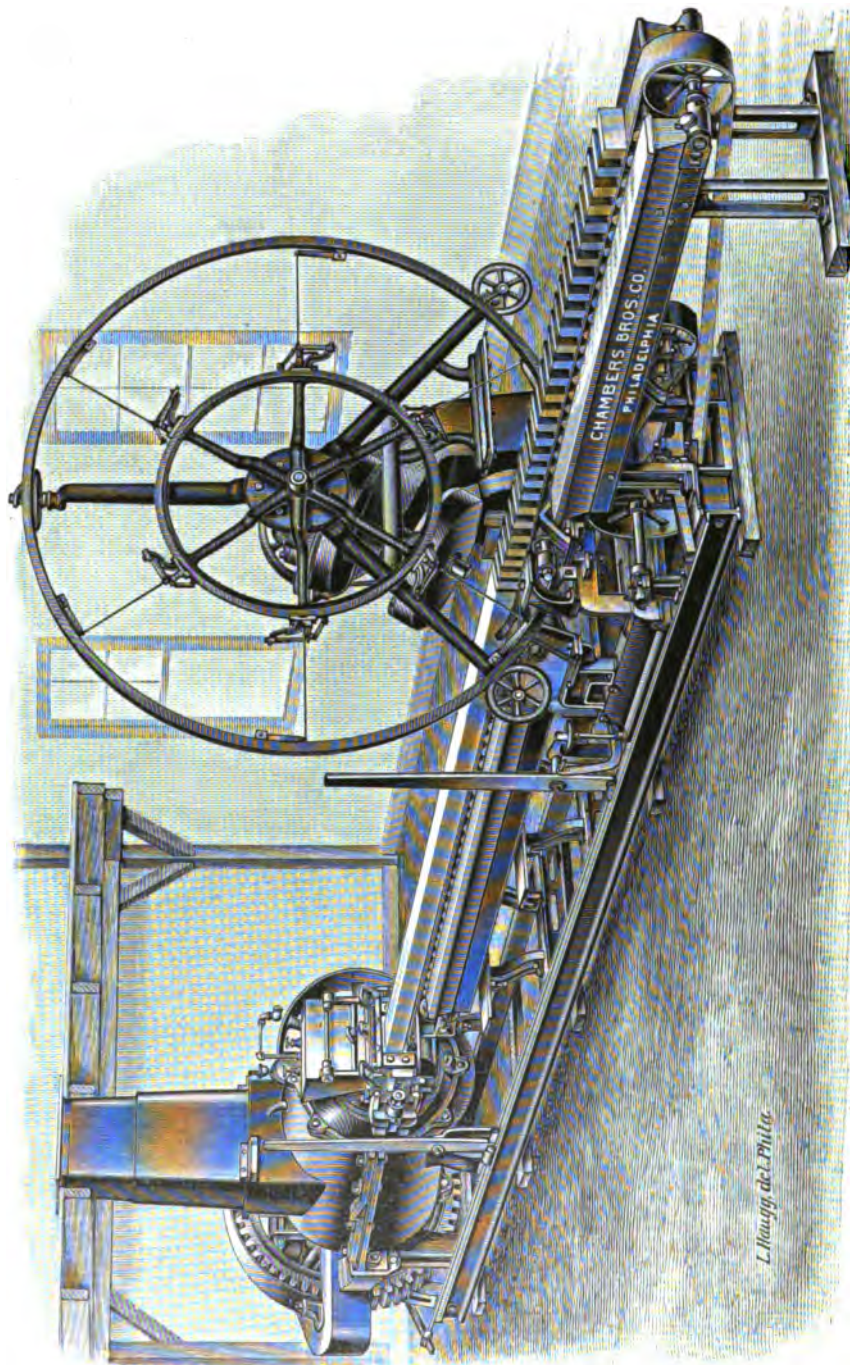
PLATE VII. Type of the Automatic Rotary Side Cutter, Horizontal Type of Stiff Mud Brick Machine and Automatic Sander.
